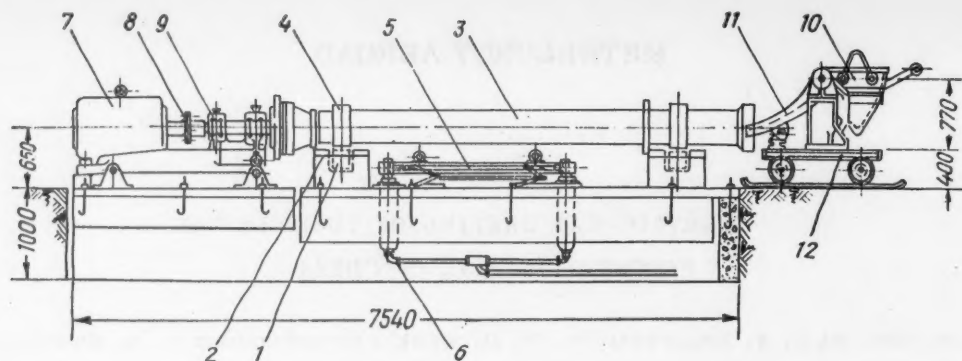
Machine for centrifugal casting of 200 mm and 250 mm pipes:
